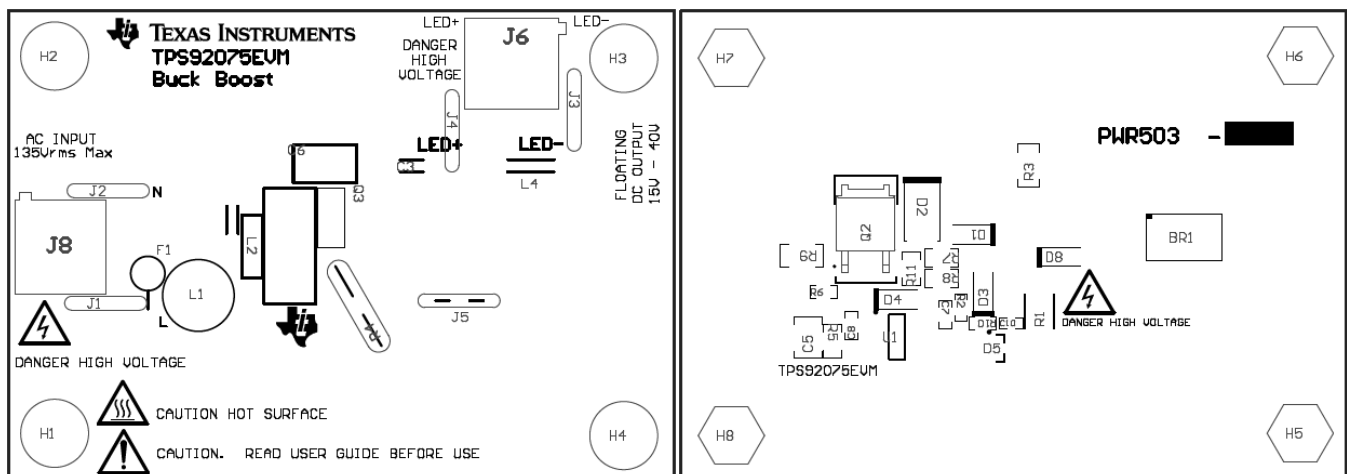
TPS92075 Buck-Boost Top (left) and Bottom (right) Layer Assembly Drawing
